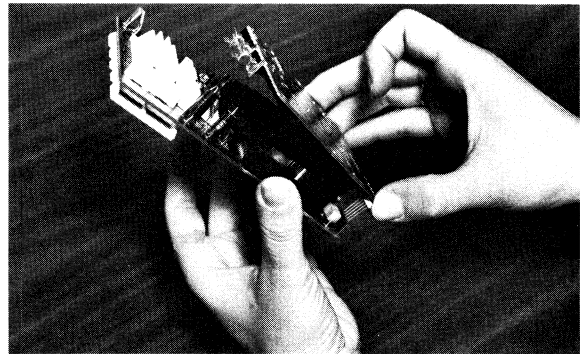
Removal/Replacement and Inspection Procedure — Electronics Assembly (continued)
